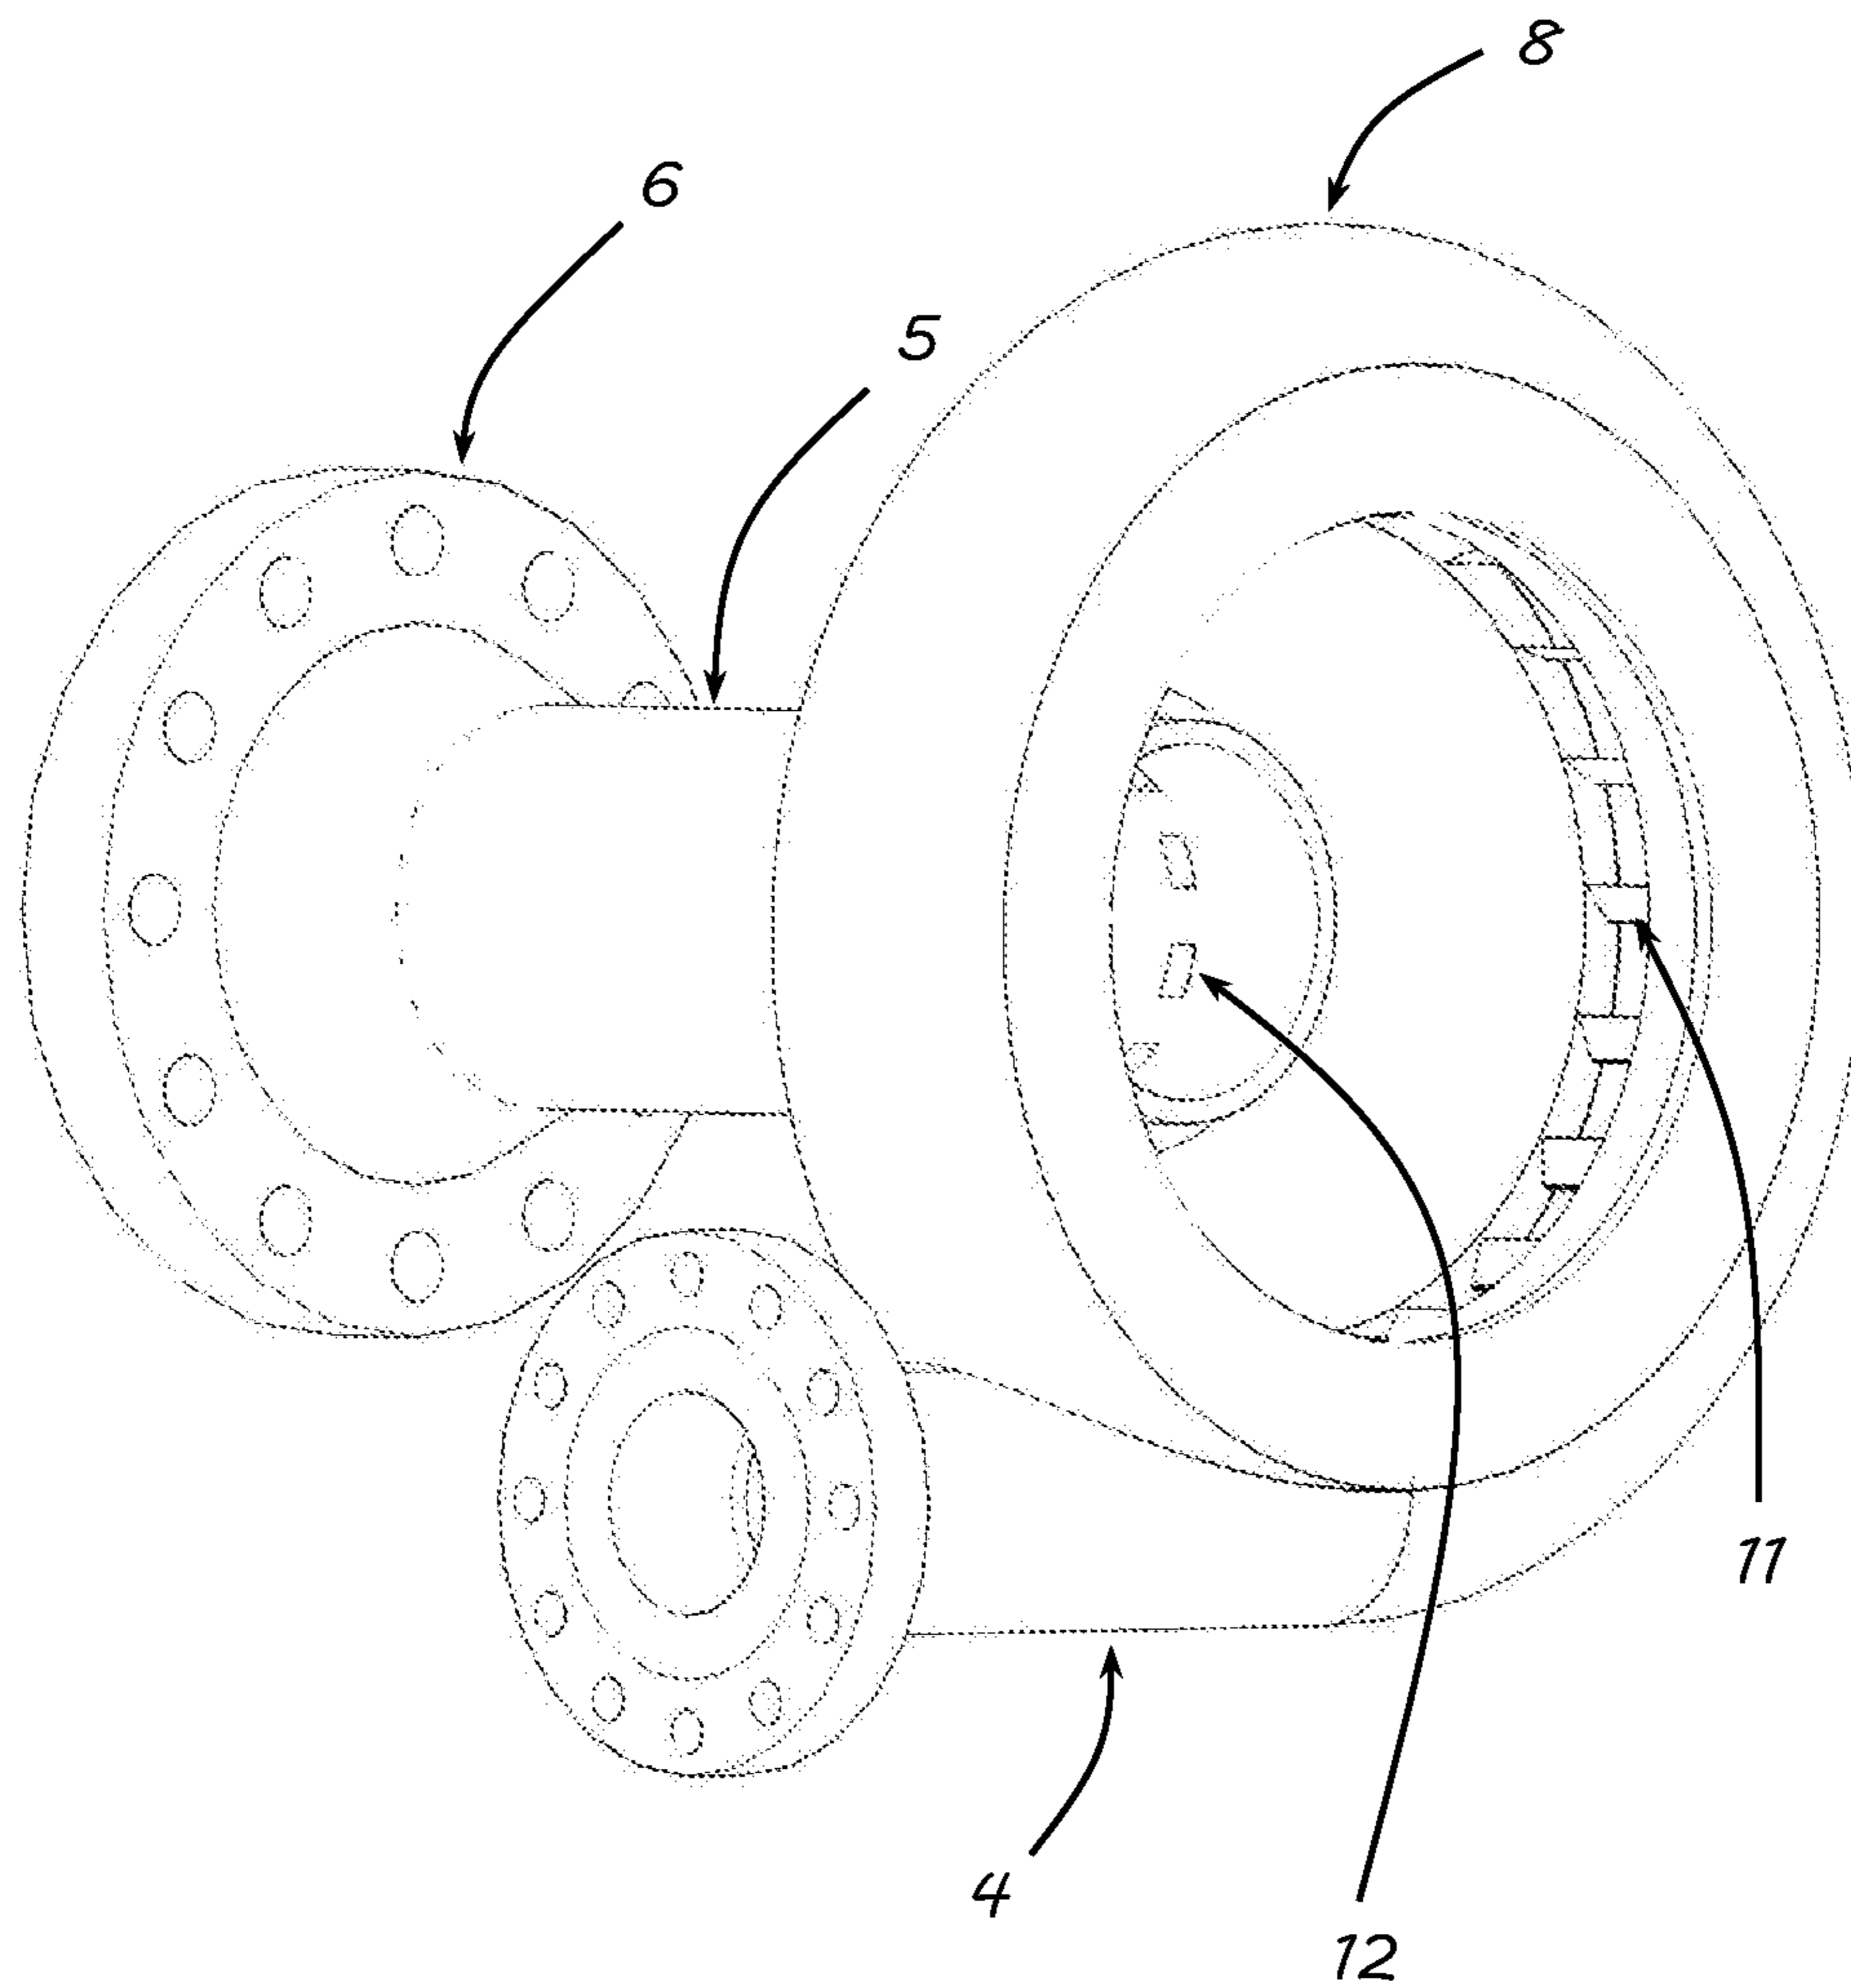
Perspective View showing the Internal Motive Fluid Inlet and Internal Discharge, and Static Vanes
